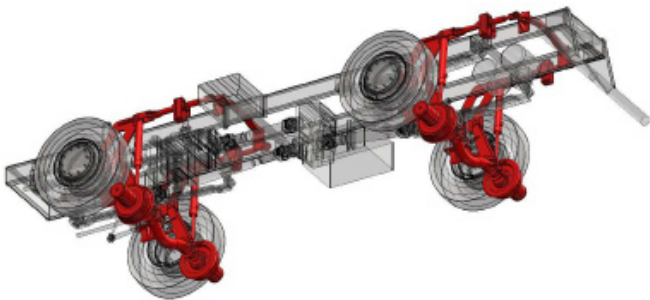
Rail running gear system – rigid mounting of the rail axle to the suspension arms with the adjustable system (axonometric views, bottom view)
